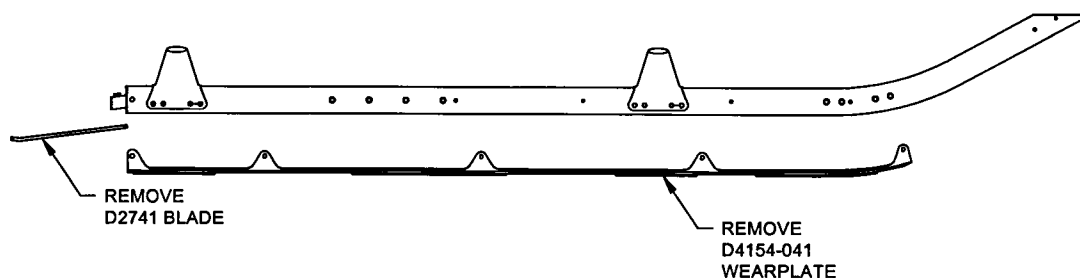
D350-636-015/-016/-017/-018 BLADE/WEARPLATE REMOVAL
